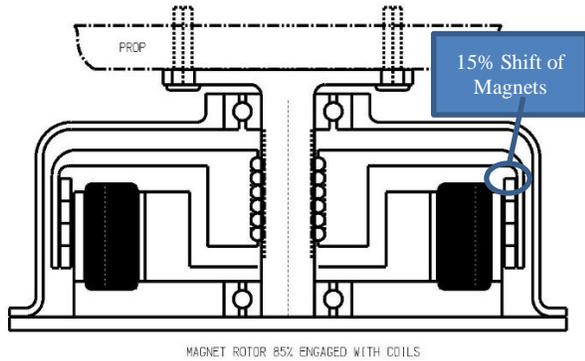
A typical DuraTrac PM motor with rotor magnets 85% engaged (15% shifted) with the stator coils to achieve a 17% rpm increase
